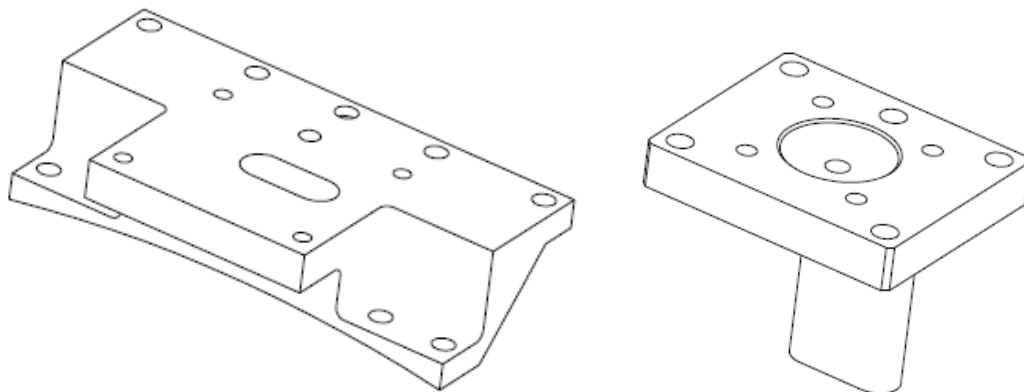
The Rotor Exit Radial Traverse Interfaces With The Fan Case Via Two Adapter Pads That Will Enable Insertion And Removal Of The Probes External To The Engine.
